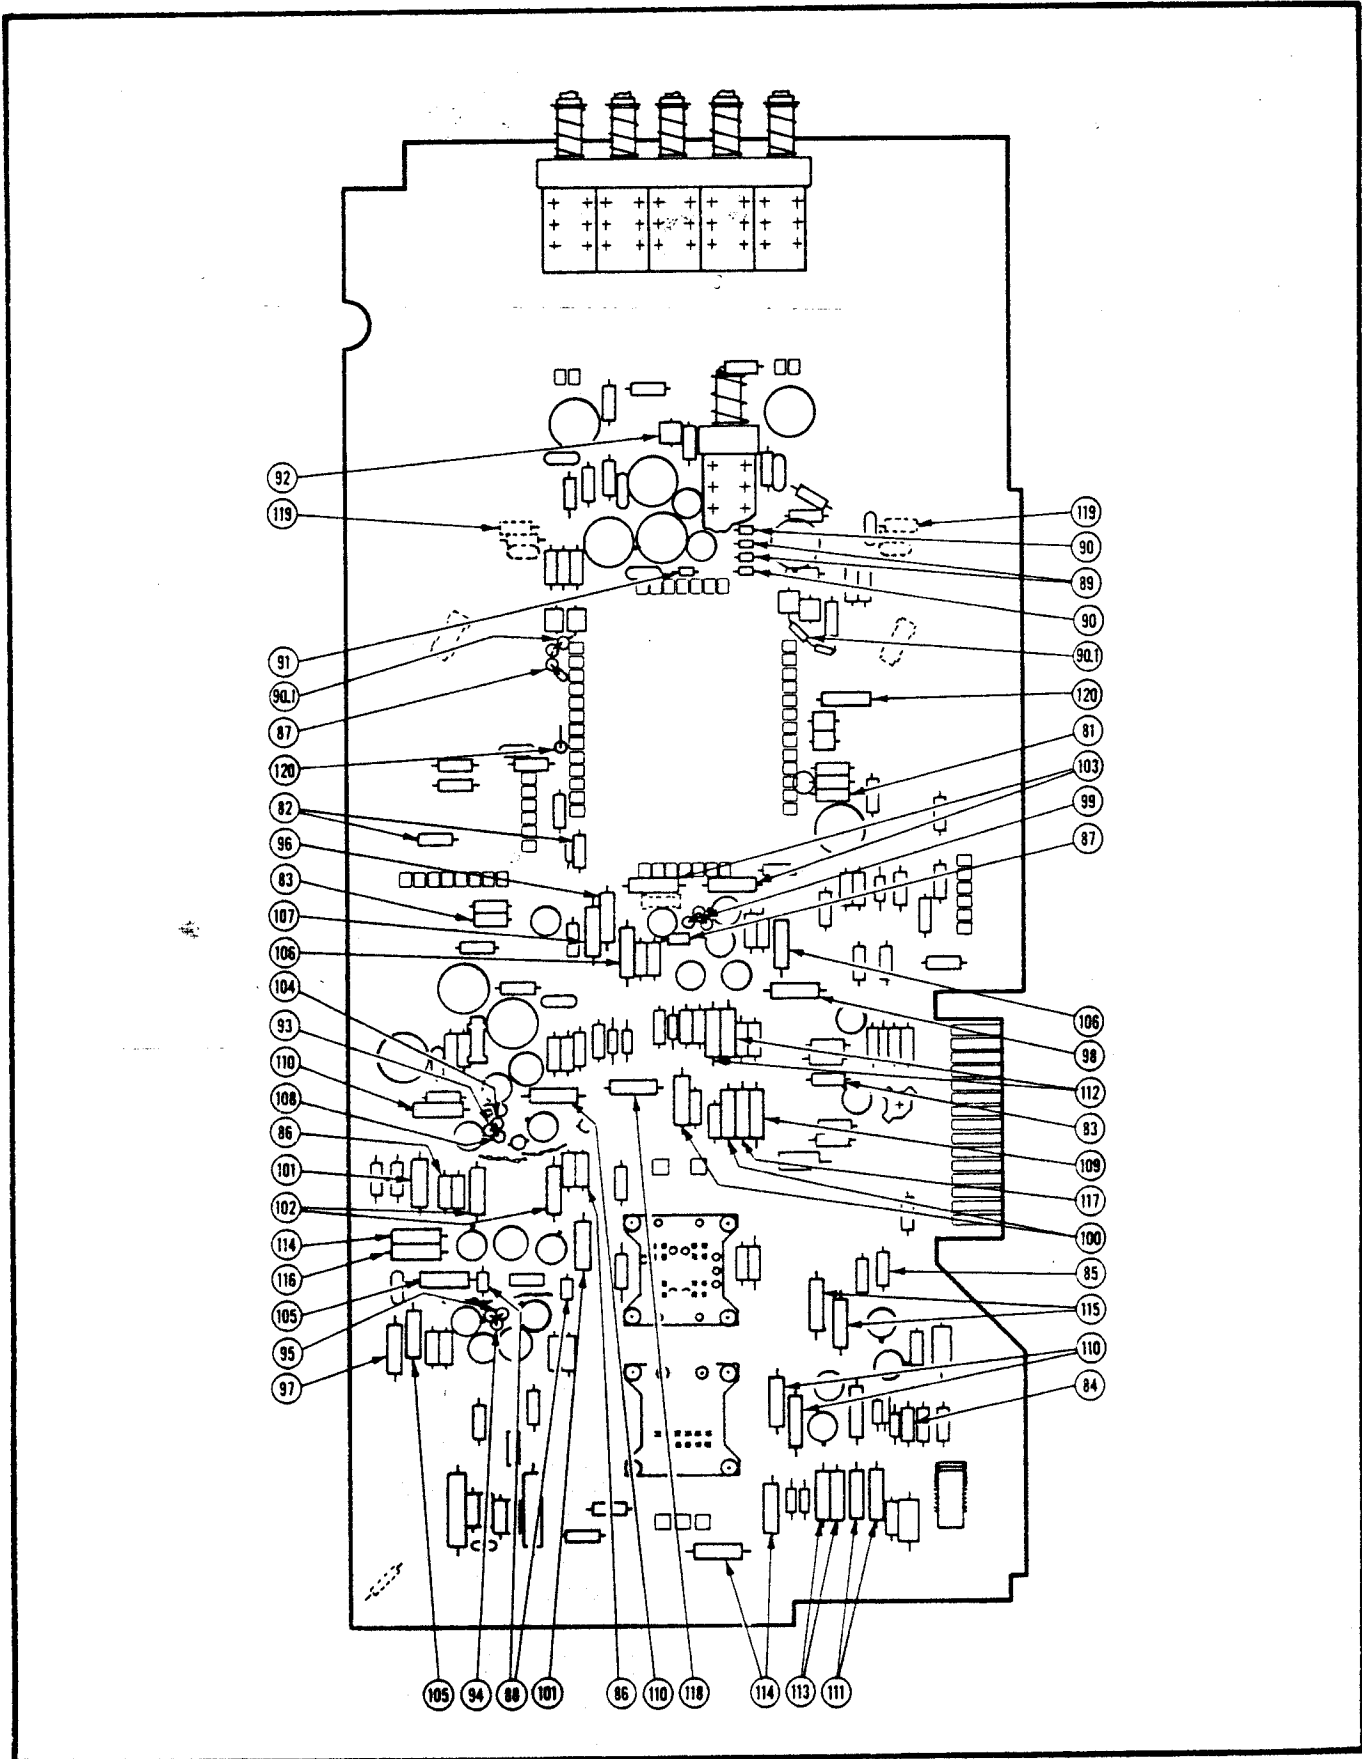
A5 Circuit Board Assembly, Vertical (sheet 3 of 4).
